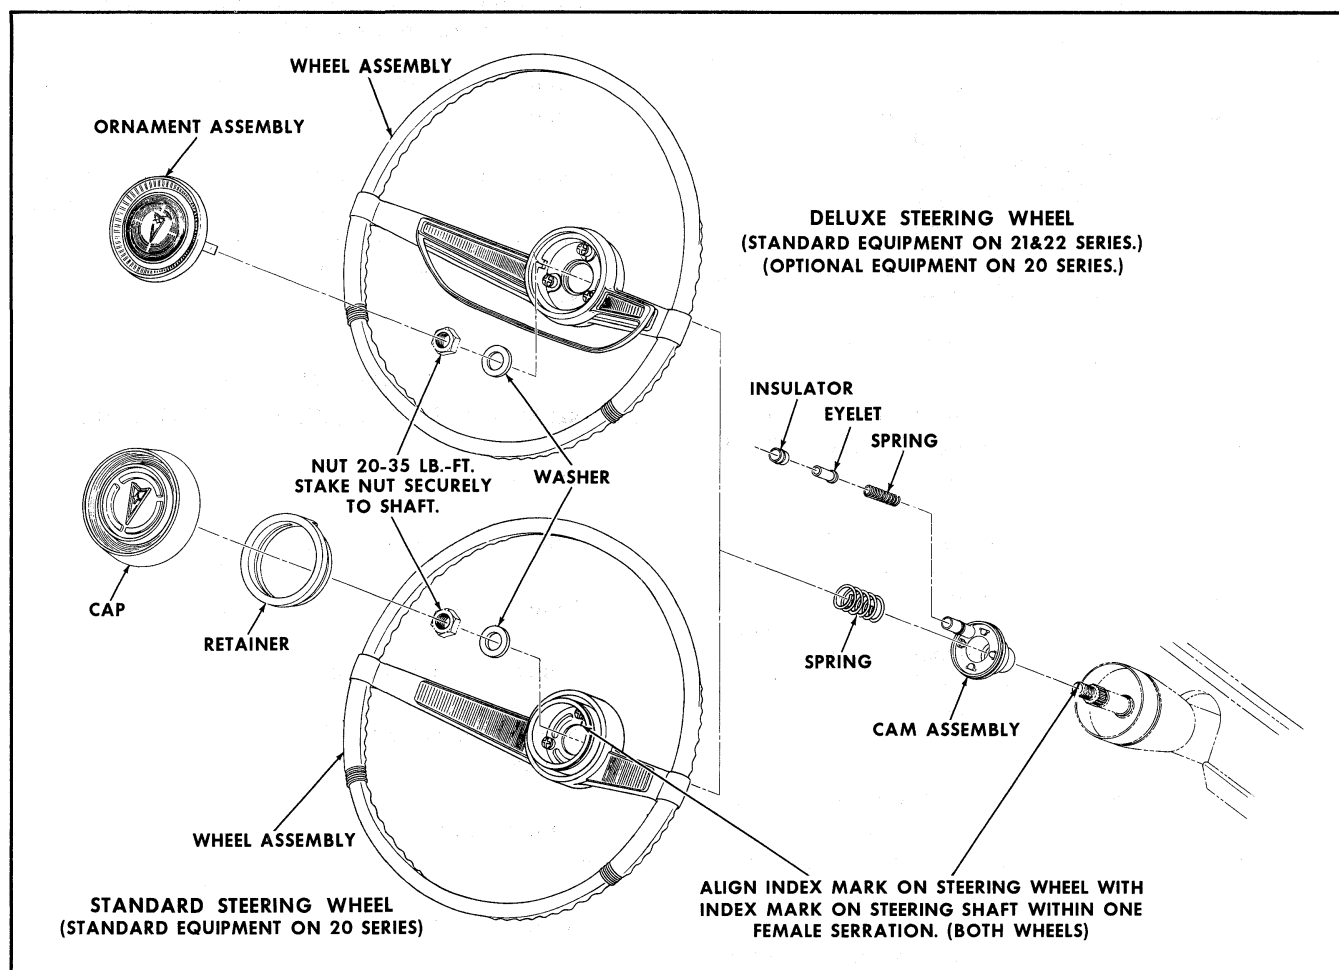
Steering Wheel and Horn Button - Exploded View
